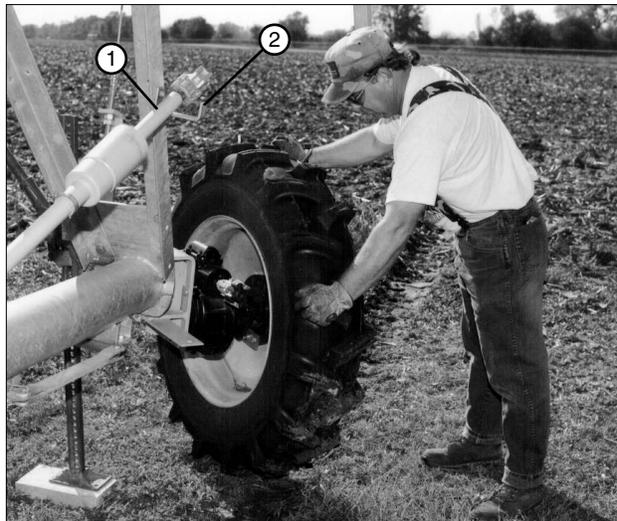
1. Drive Shaft 2. Drive Shaft Keeper
